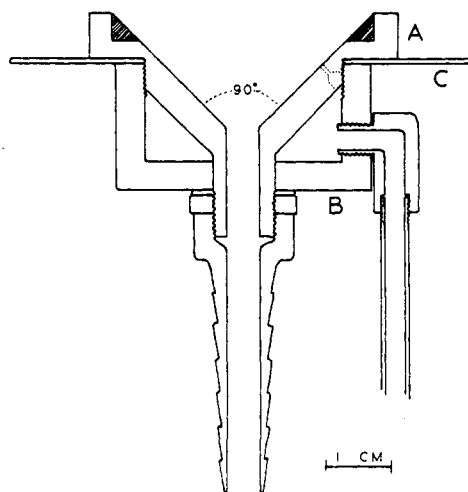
Alternative stator with adjustable central inlet for allowing air partially to relieve the vacuum below the rotor.
